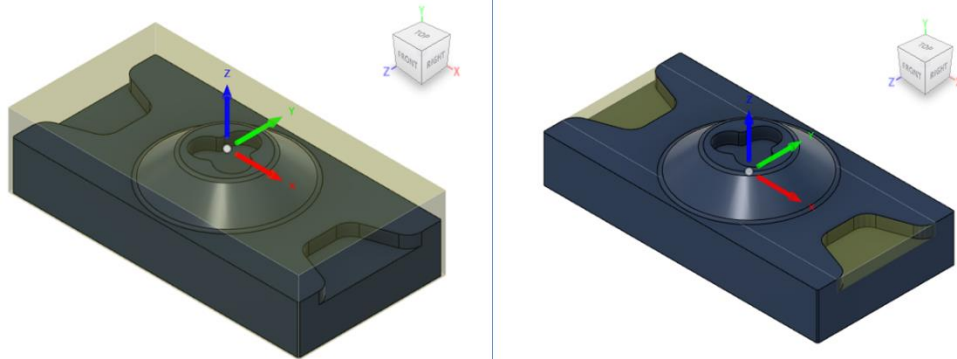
Different Types of Stock on CAM Programming, (a) stock defined for machining the full part; (b) stock defined to machine two different sections of the same part
